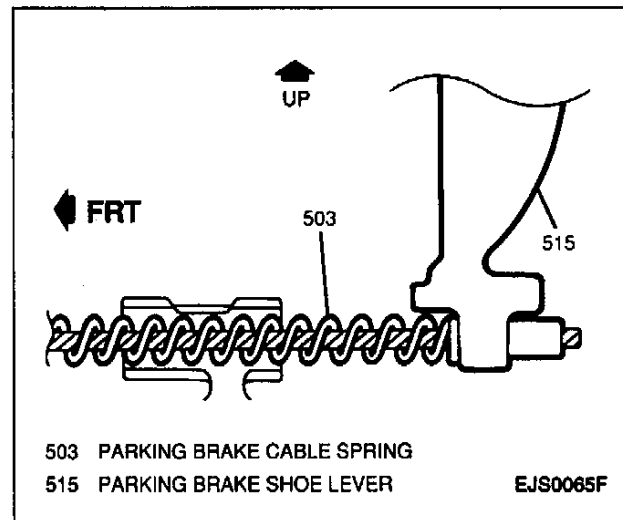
Parking Brake Cable at Parking Brake Shoe Lever
